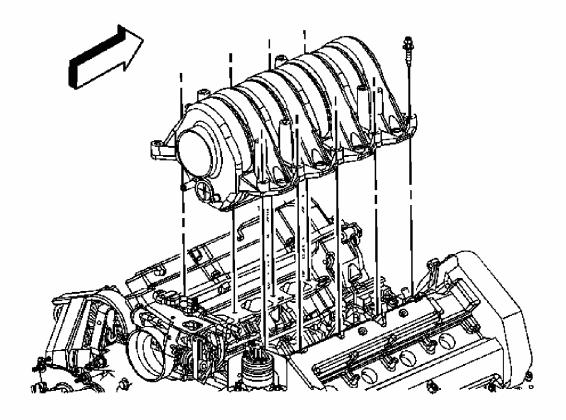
Intake Manifold Courtesy of GENERAL MOTORS CORP.
